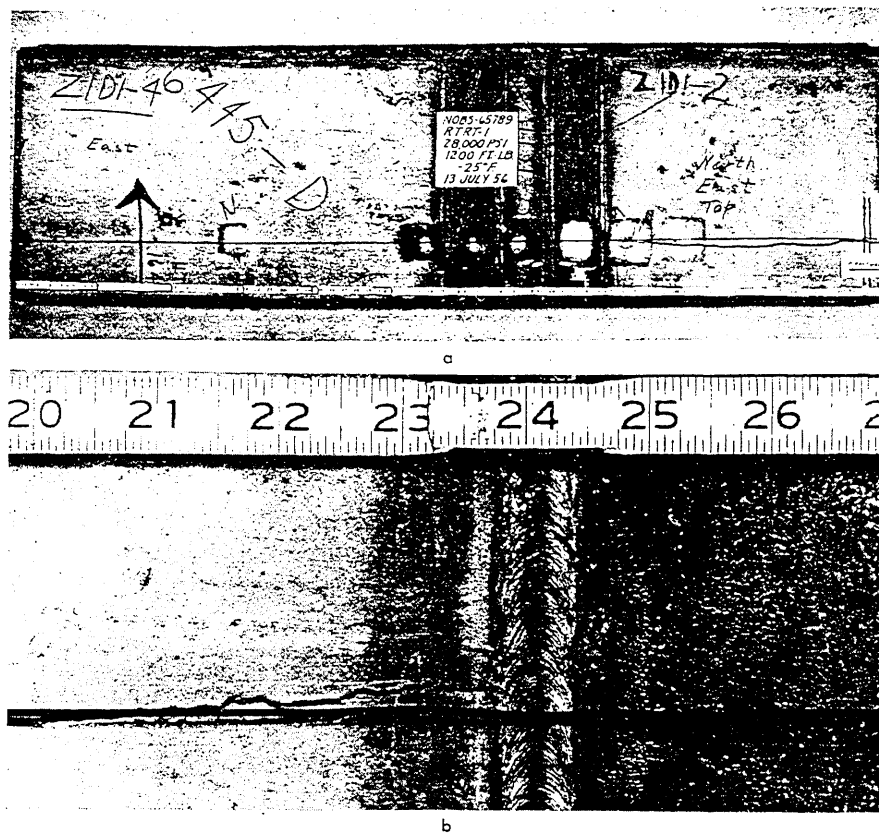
Arrest of 2-ft long crack by 4-in. wide strake of T steel
